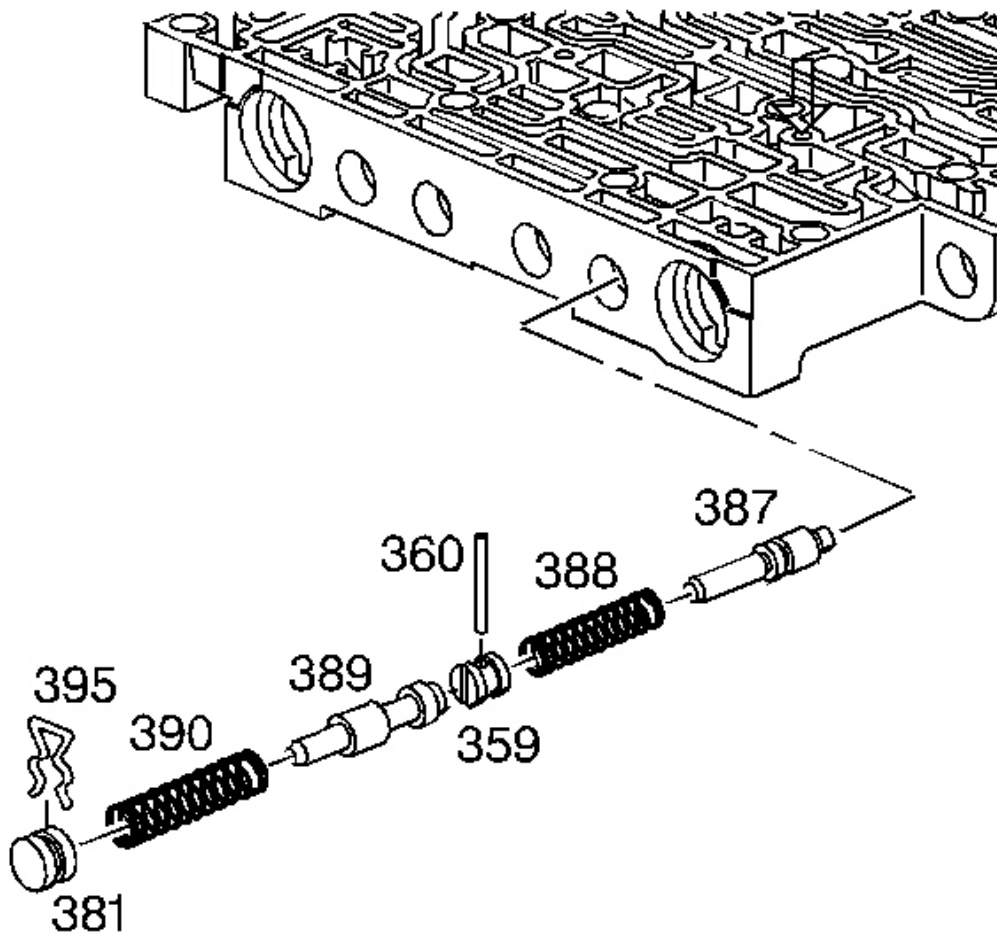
View Of Reverse Abuse Valve & 3-2 Downshift Valve
